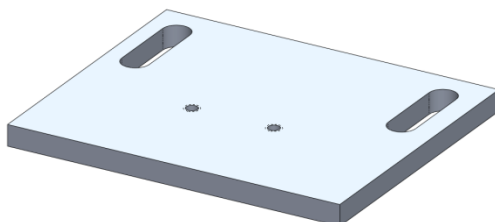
Aluminum adapter plate allows the string potentiometer to be mounted to any bike frame that has standard water bottle cage mounting holes.
